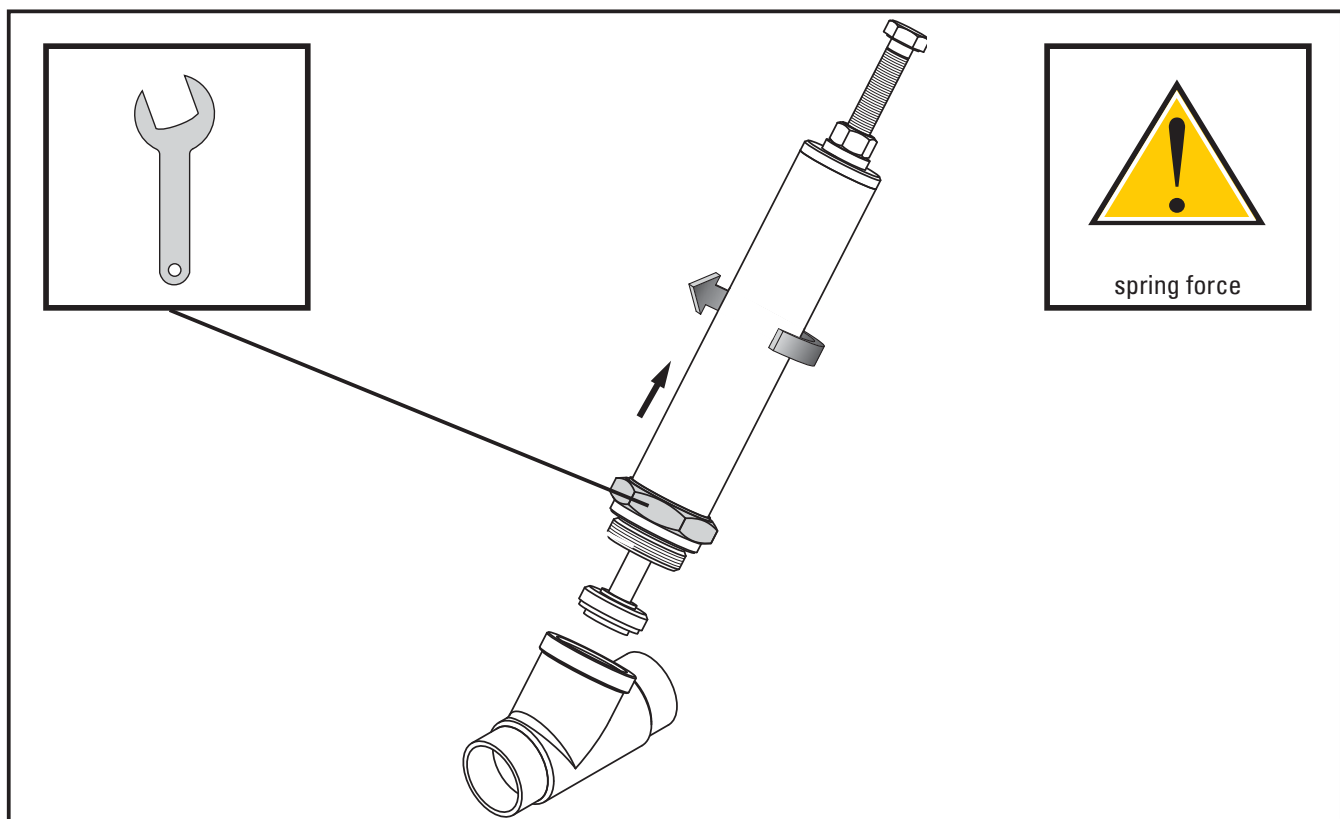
spill valves, disassembly of the spring bonnet (Fig.: Art. UV330164)
